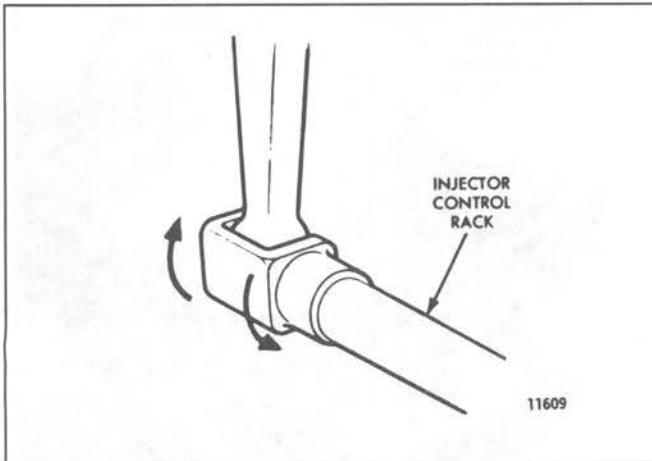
Checking Rotating Movement of Injector Control Rack
